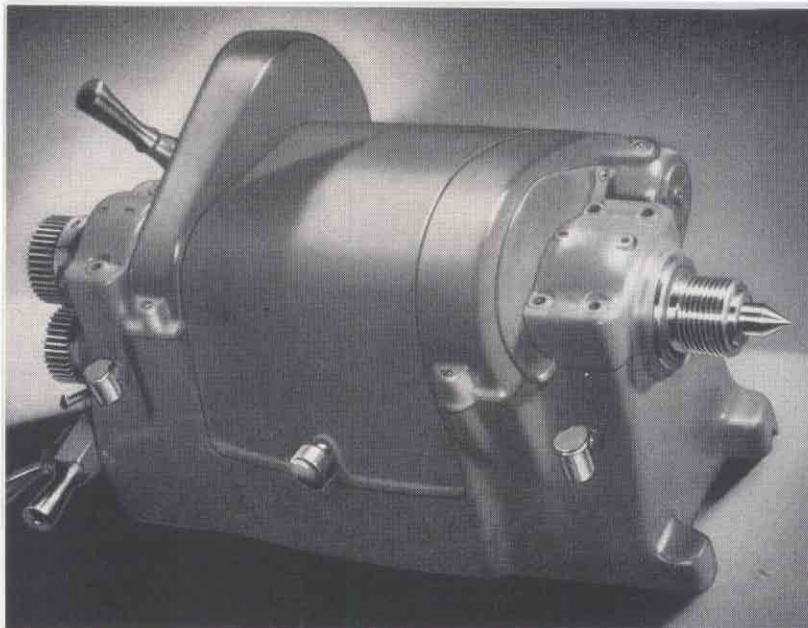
Headstock for 16-inch Swing South Bend Lathe
